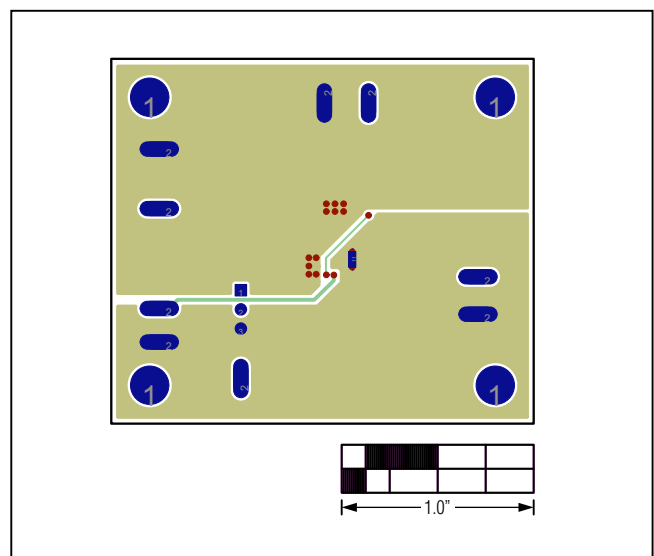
MAX17542G 5V Output EV Kit PCB Layout—Solder Side
